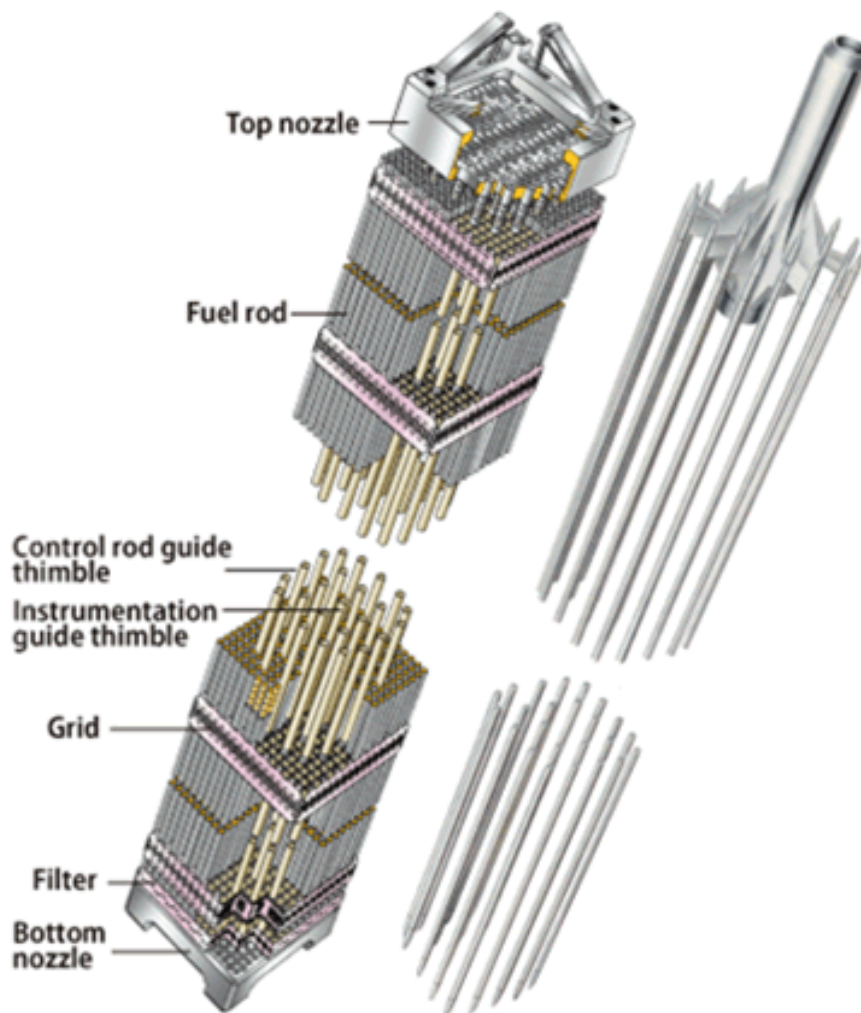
A nuclear fuel assembly with the rod cluster control assembly [16].
